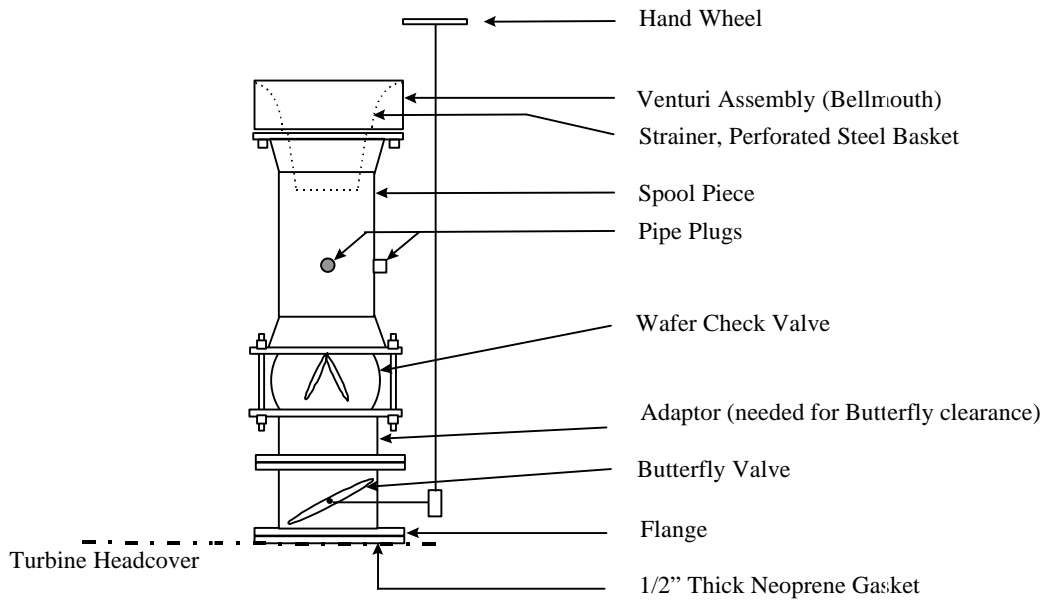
Bypass Piping Installed at Bull Shoals Dam
